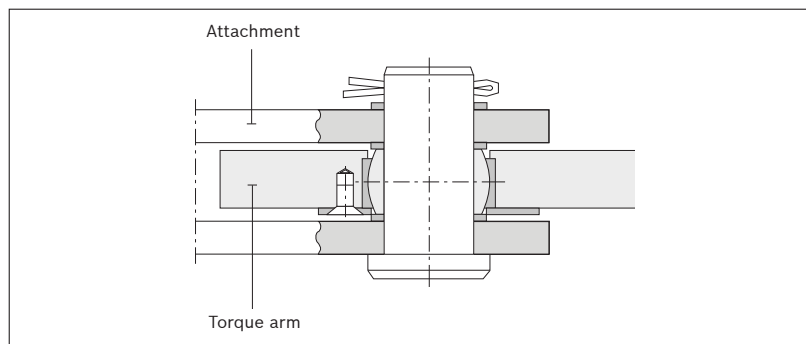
Mounting of torque arm on pivoted attachment TMA 20, 40, 60, 80, 100.
